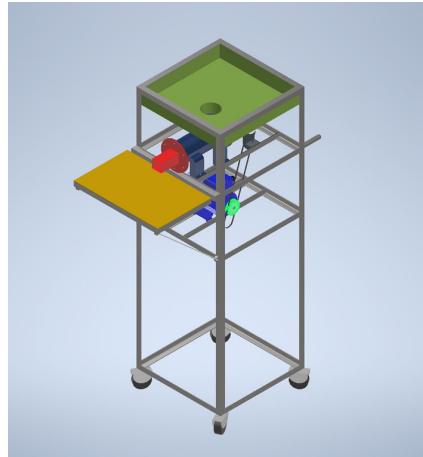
3D Prototype Design of Briquette Printing Machine
